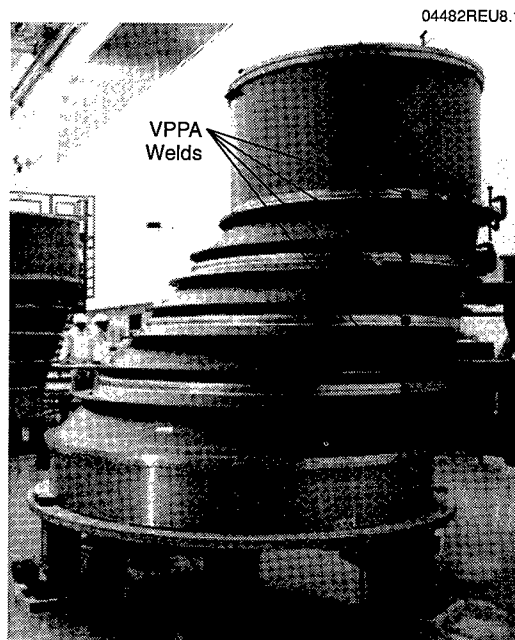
The completed pressure shell welded assembly stands over 7-ft high and weighs approximately 700 lb.
